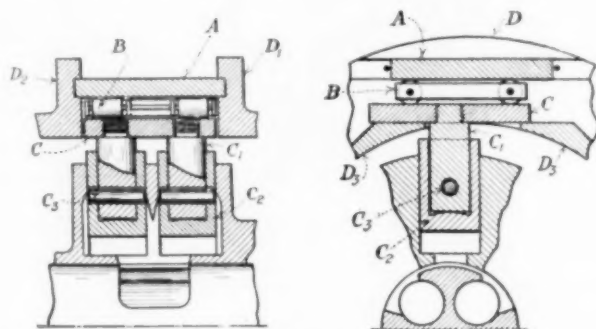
DETAILS OF PLUNGER AND CROSSHEAD UNIT
